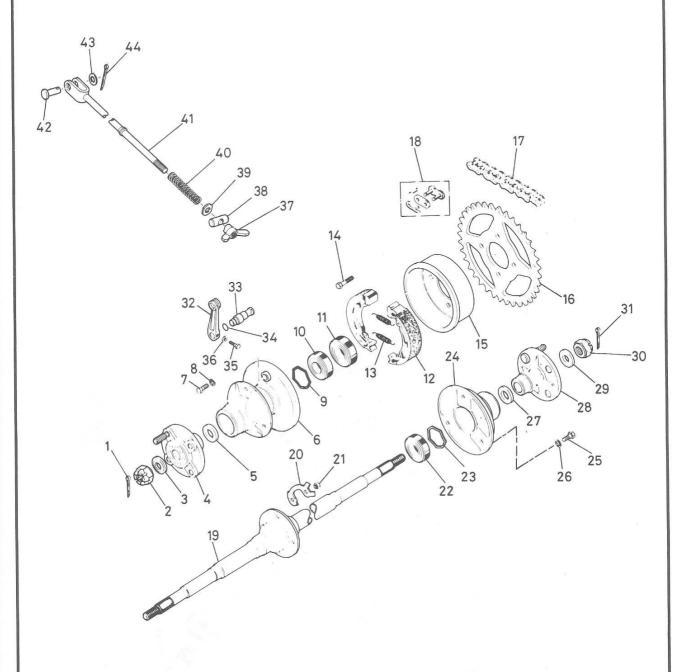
Final drive - KLT200 B and KLT250 A (Sec 6)
